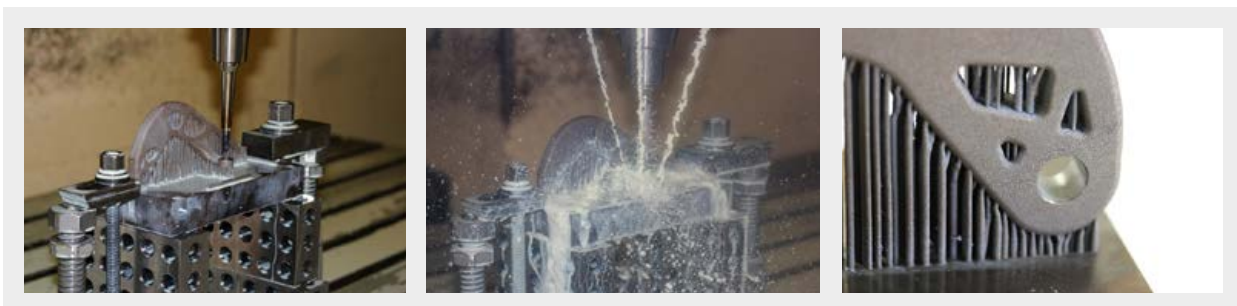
Machining interfaces and holes, verifying and controlling part dimensions
